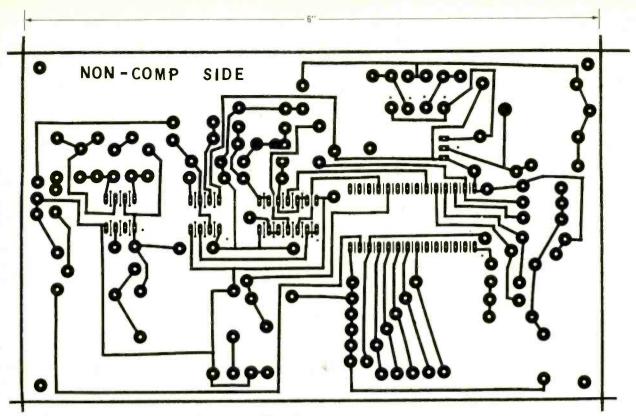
FOIL PATTERN for the single-sided printed-circuit board.
